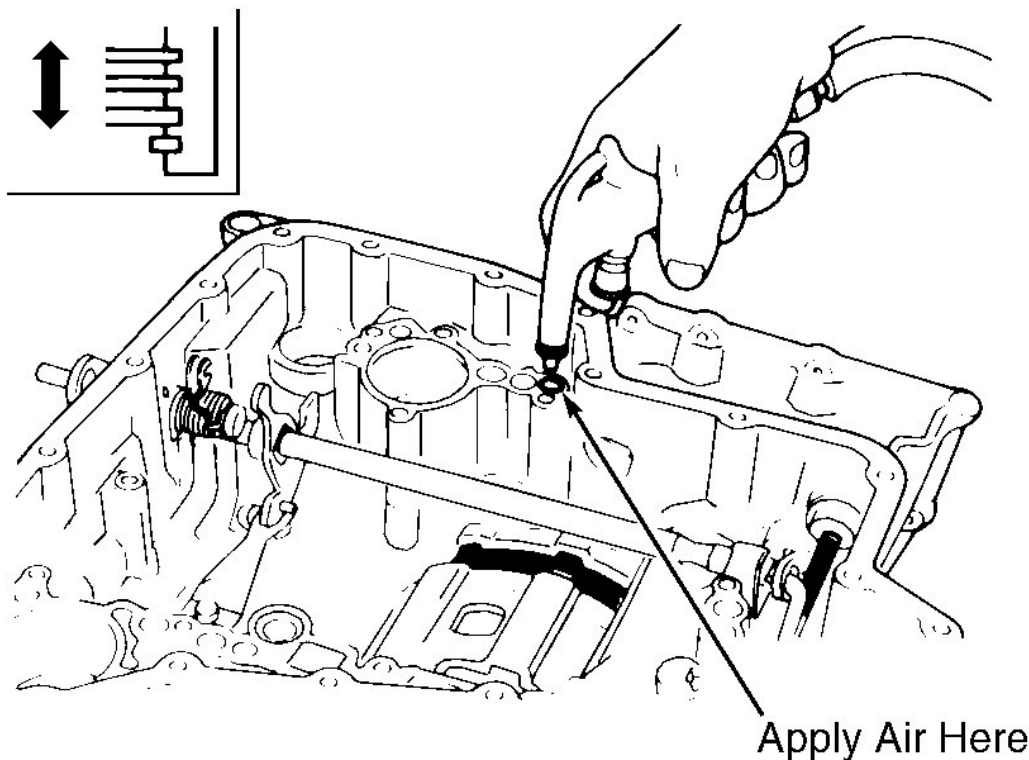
Measuring Low-Reverse Brake Clutch Clearance
